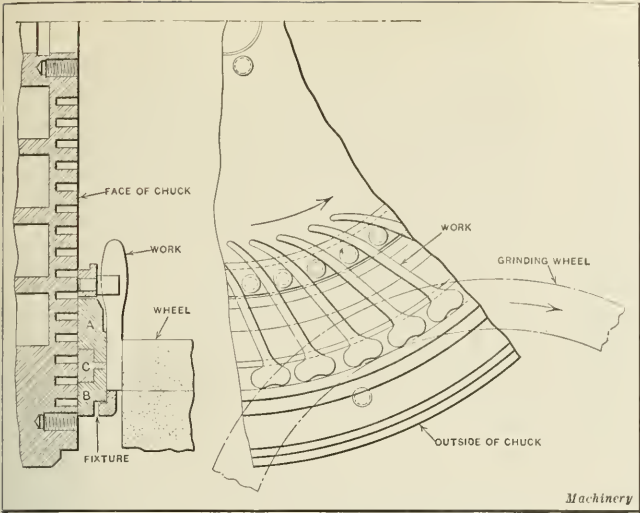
Magnetic Fixture for holding Handles for Cut Nippers
